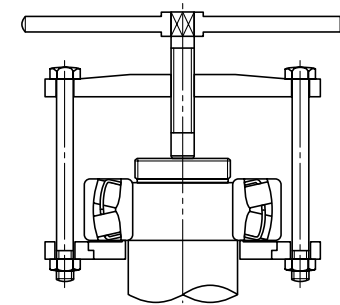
Dismounting Bearing with Spanner Wrench
